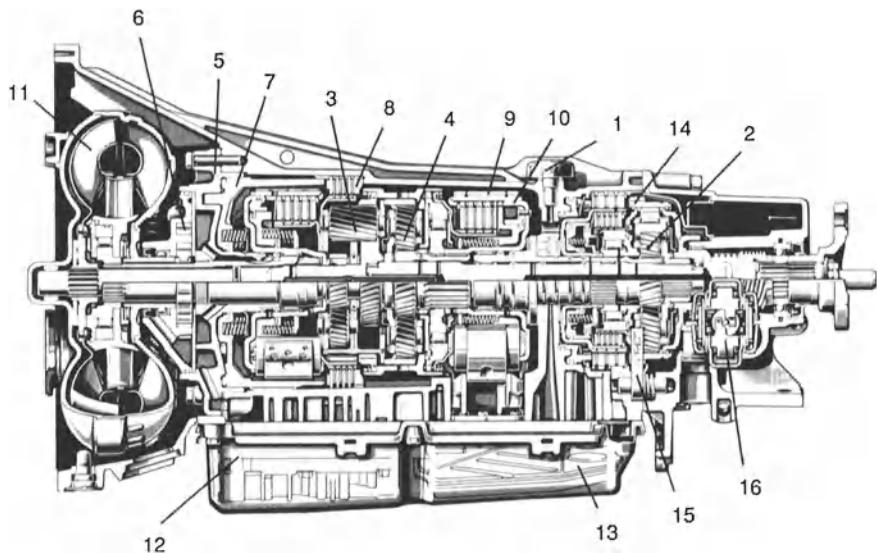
Scheme for a five speed automatic powershift gearbox (courtesy of Mercedes)
